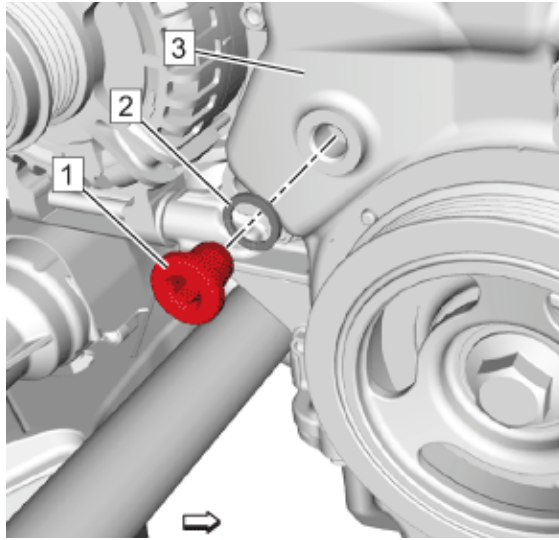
Engine Front Cover, Hole Plug And Seal Ring
